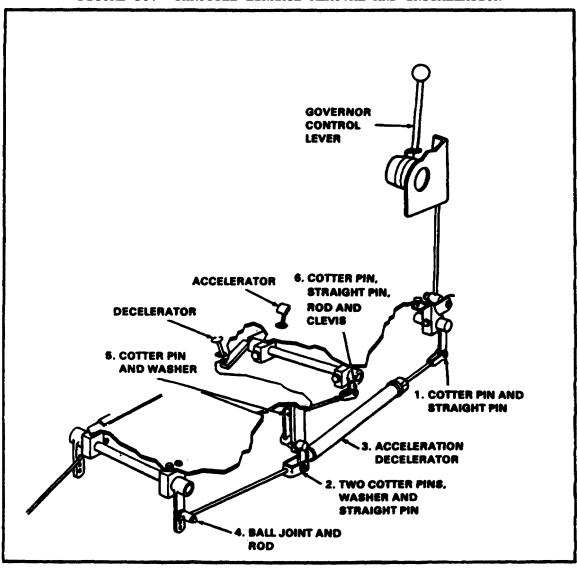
THROTTLE LINKAGE REMOVAL AND INSTALLATION
